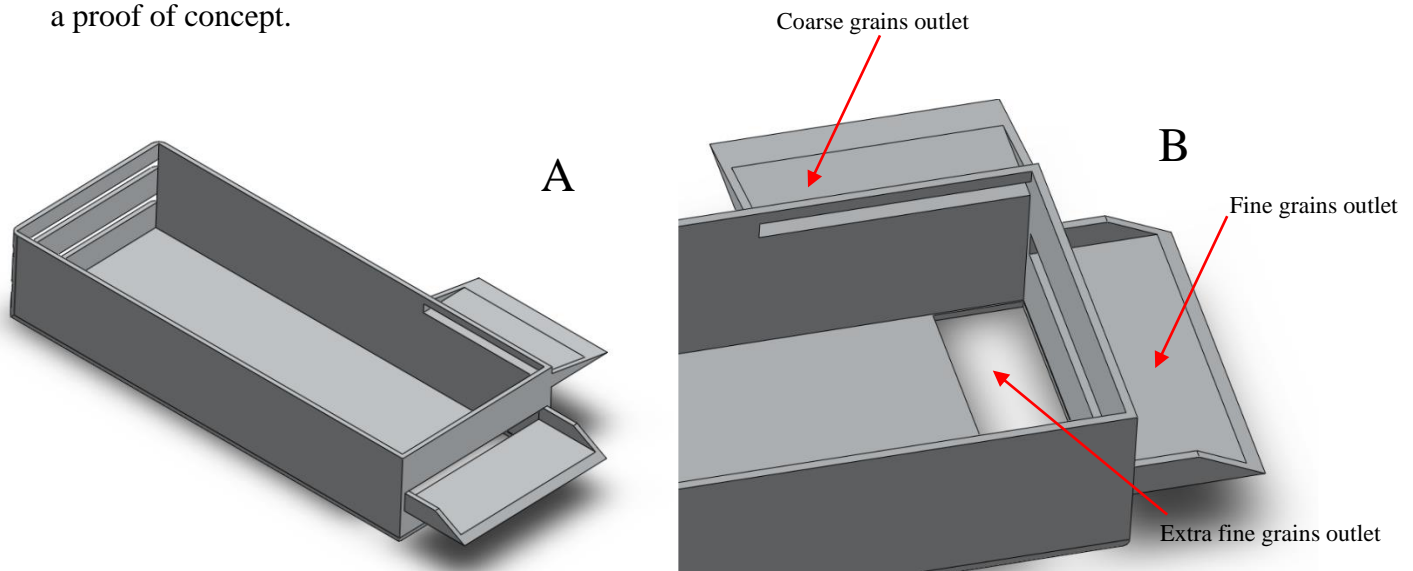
Sieve Tray. A - whole part and B – View of front sections showing outlets
